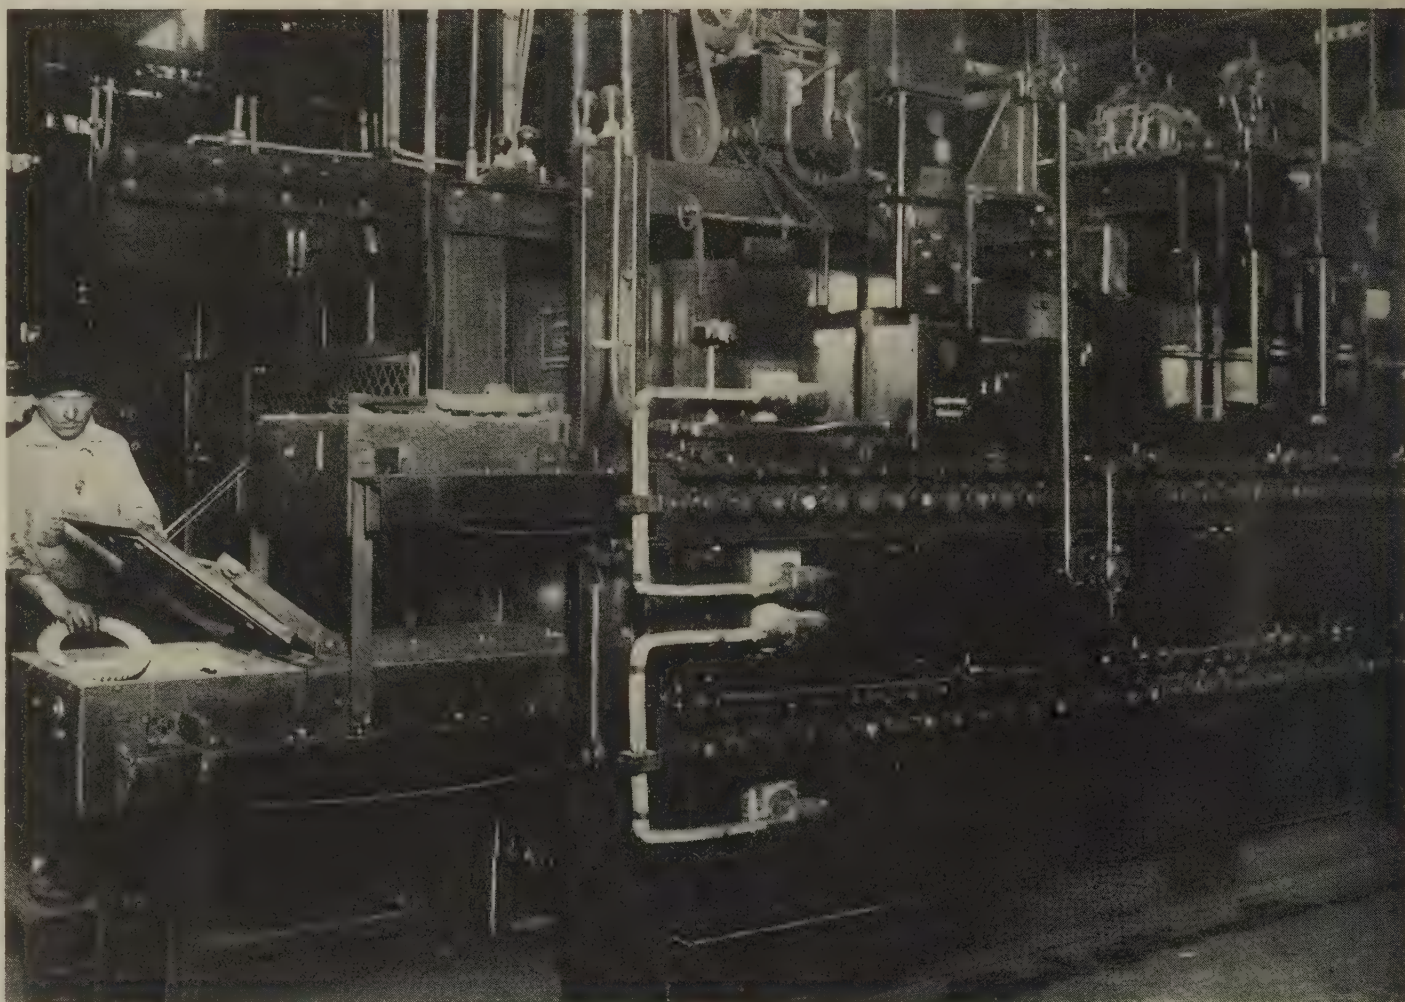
Double-Hearth Hardening Furnace for Ring Gears. Hearth bottoms are rollers, ratchet-driven through bars, cranks, and rod to eccentric on top of furnace
